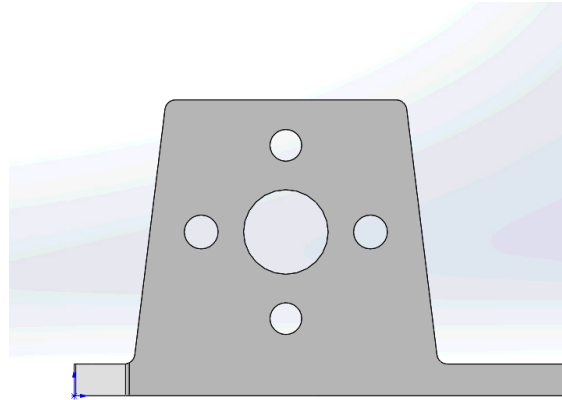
The part of the gripper base which will be assembled to the arm in the Solidworks environment
